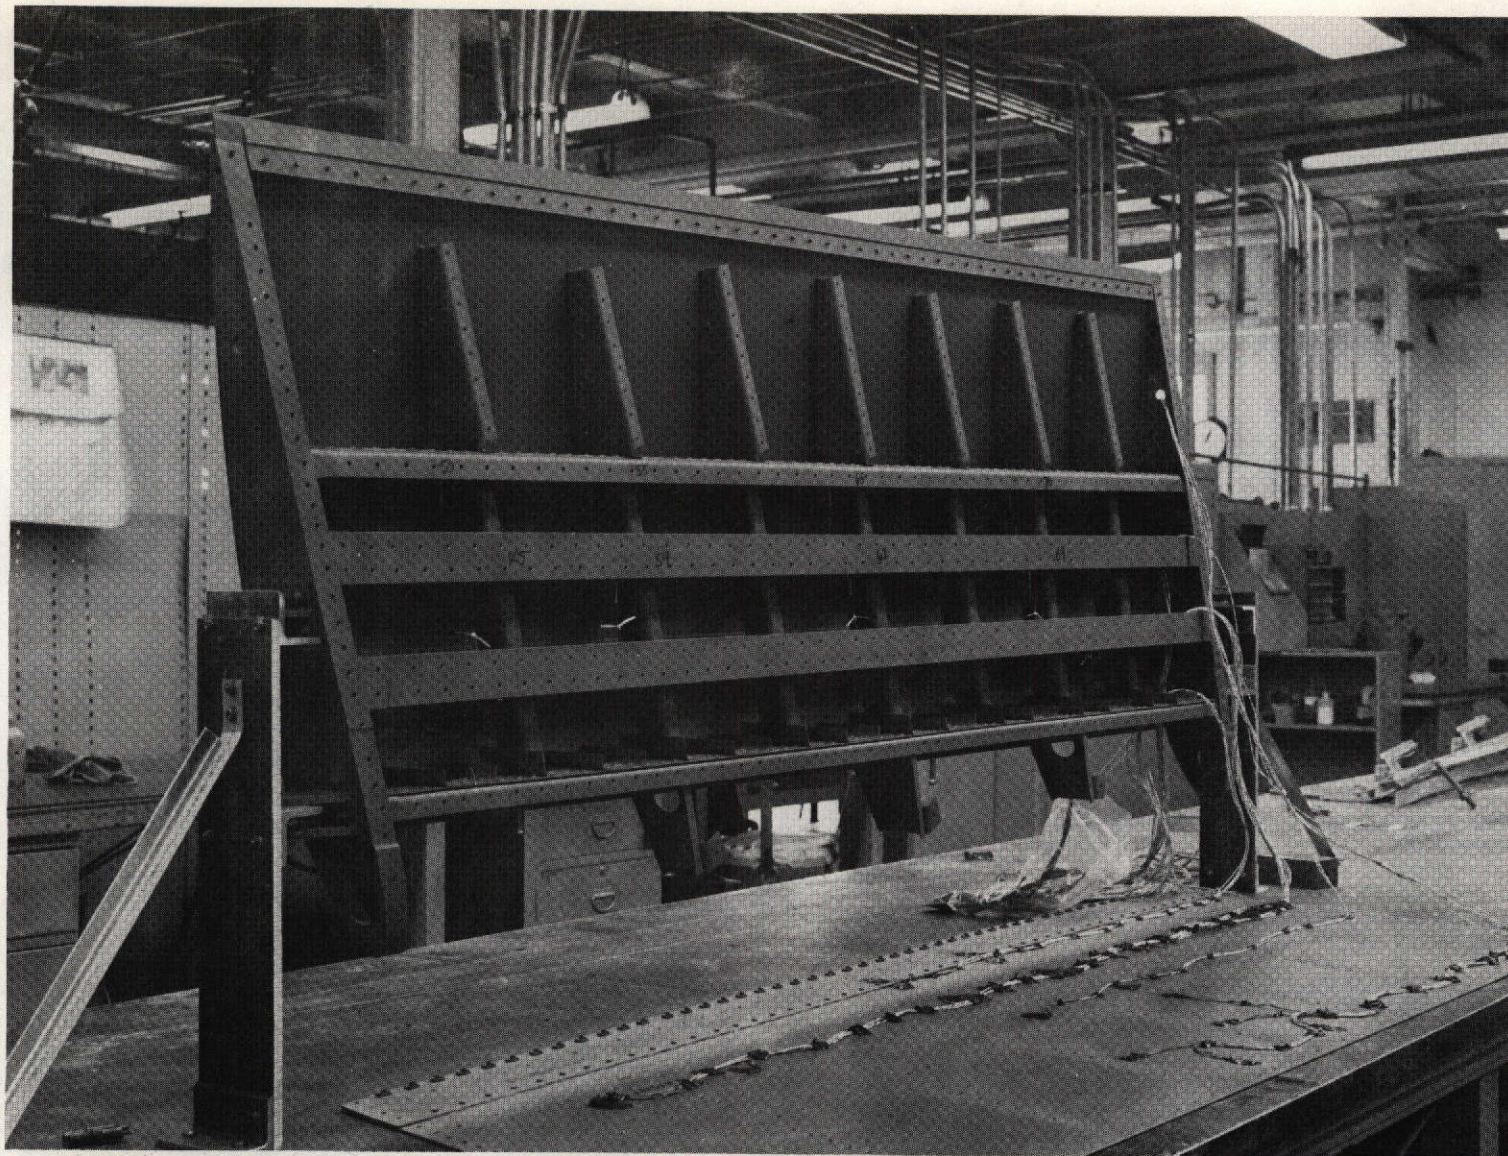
FLAP SUBASSEMBLY AND INSTRUMENTED LOWER SKIN
